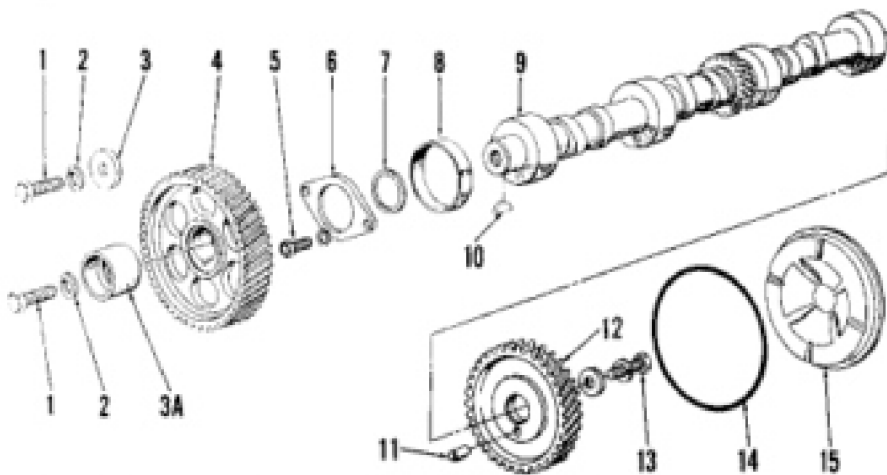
Exploded view drawing of camshaft, camshaft gear and hydraulic pump drive gear. End play is controlled by thrust plate (6). Renewable camshaft bearings (8) are used in cylinder block for all camshaft journals. Washer (3) is used on diesel models; fuel pump eccentric (3A) is used on gasoline models.
